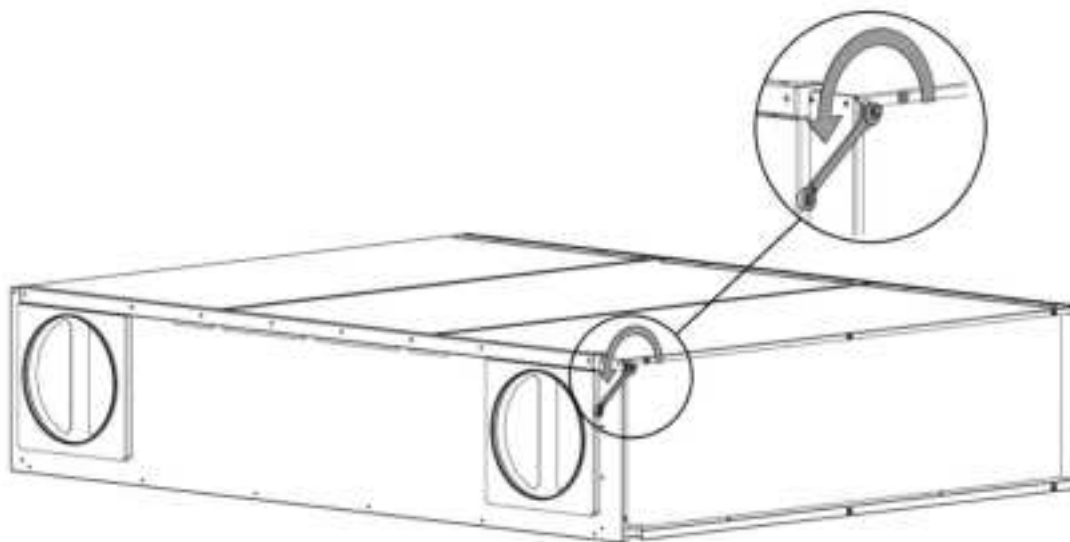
Disassemble the rear bracket, right-hand side seen from behind
